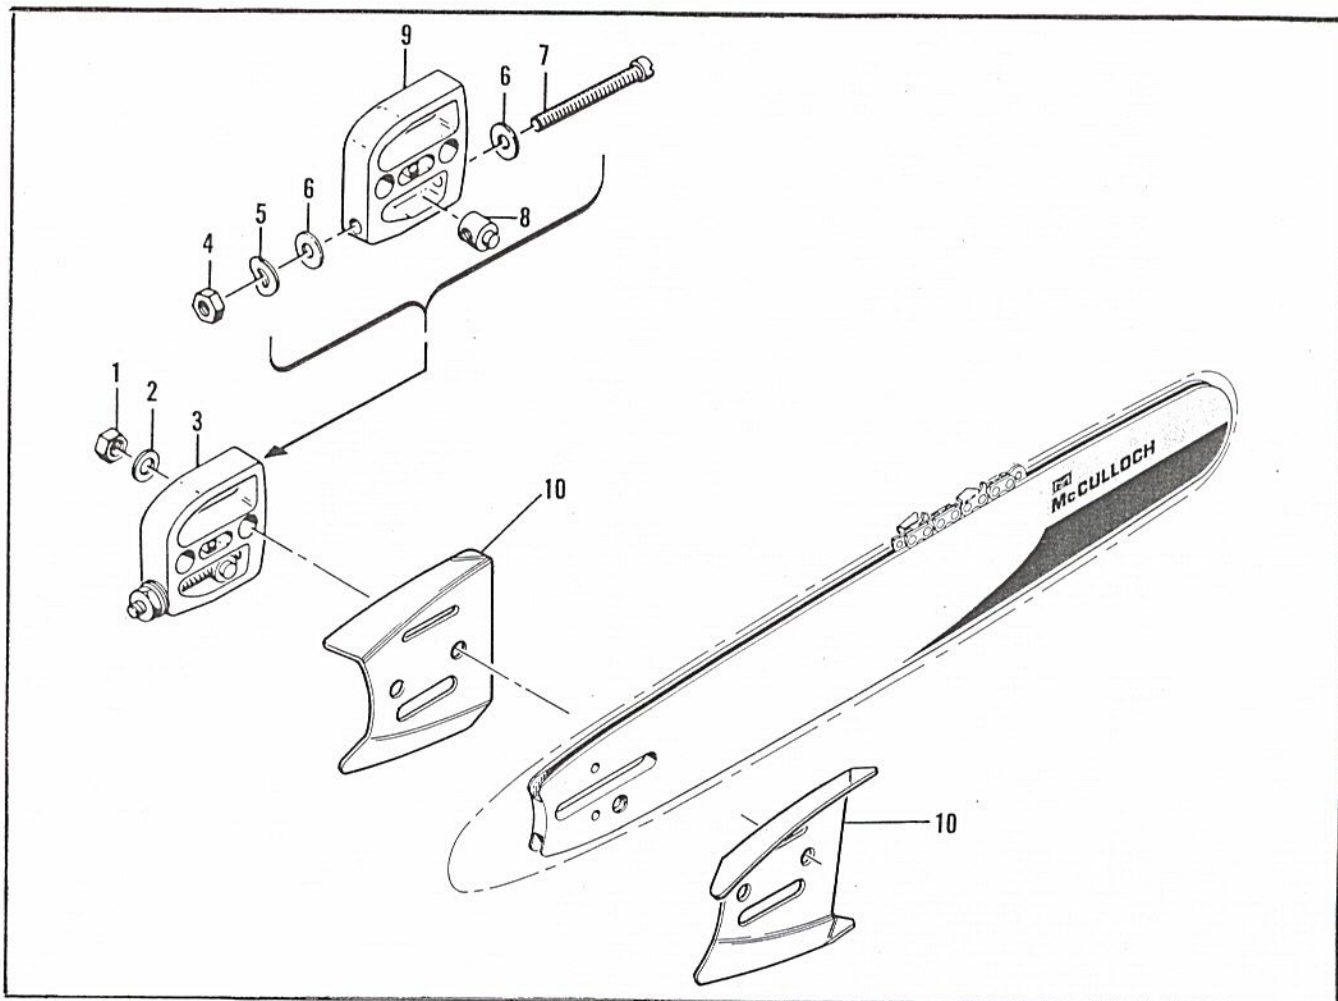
LOCKPLATE ADJUSTING ASSEMBLY
